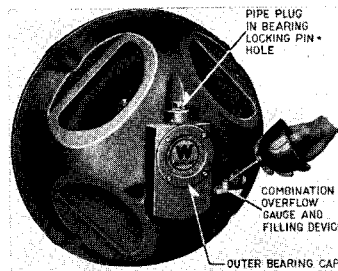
SEALED SLEEVE BEARING BRACKET SHOWING METHOD OF OILING
